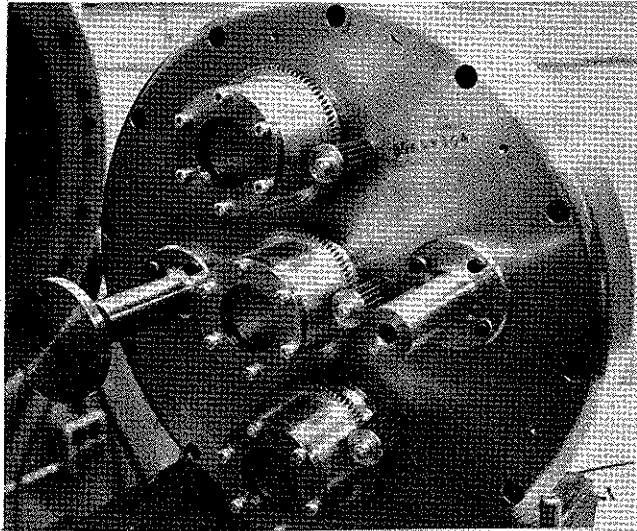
Baseplate Assembly with Mounted Focusing Lenses
